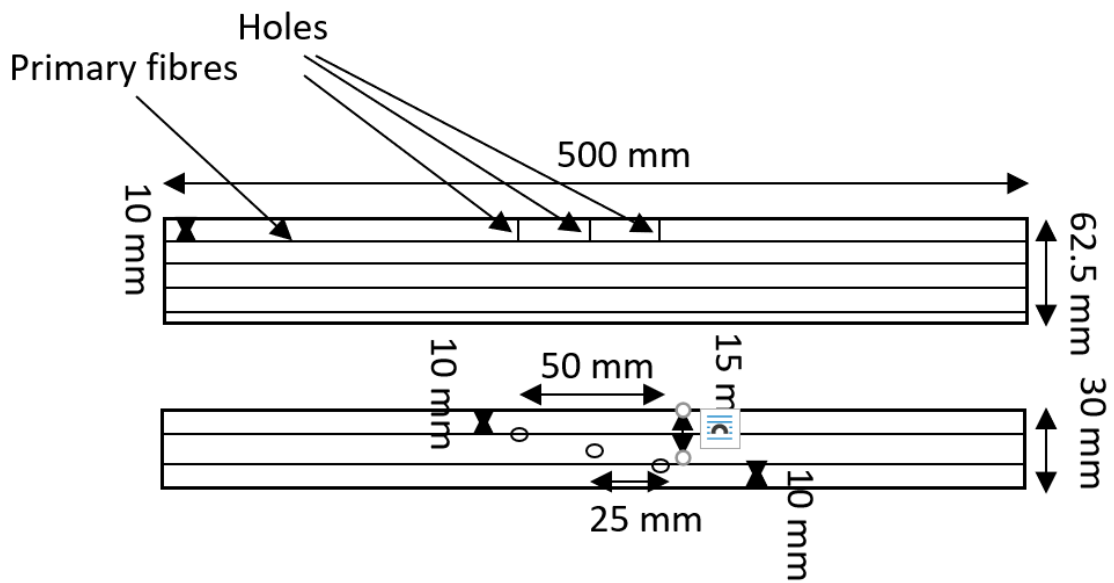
Locations of three drilled holes in unidirectional 30-mm specimen.
